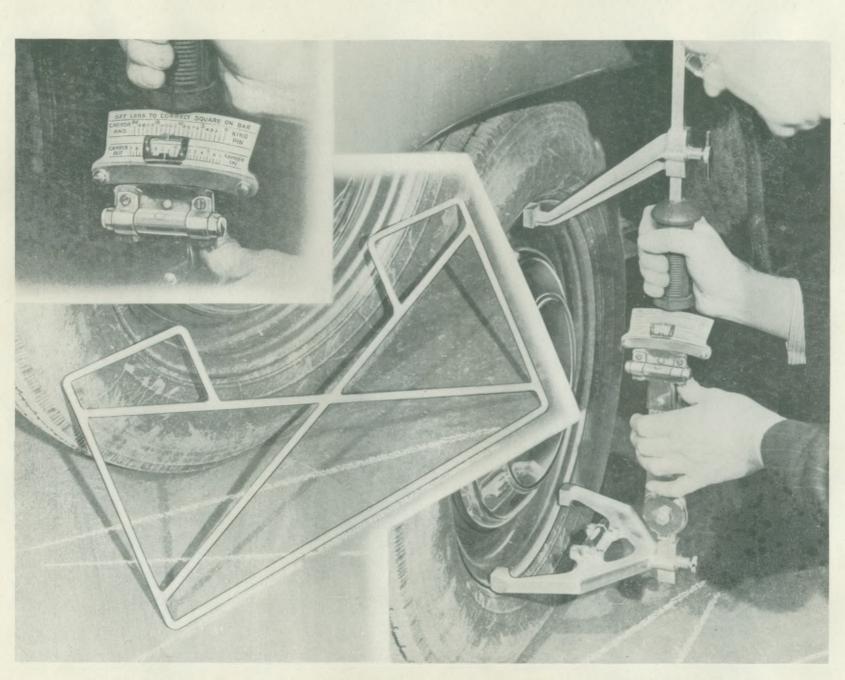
Illustrating the measurement of wheel camber with Dunlop gauge, in the steered-left position, and the use of template for setting road wheels. Inset is an enlarged view showing the graduation of the quadrant
